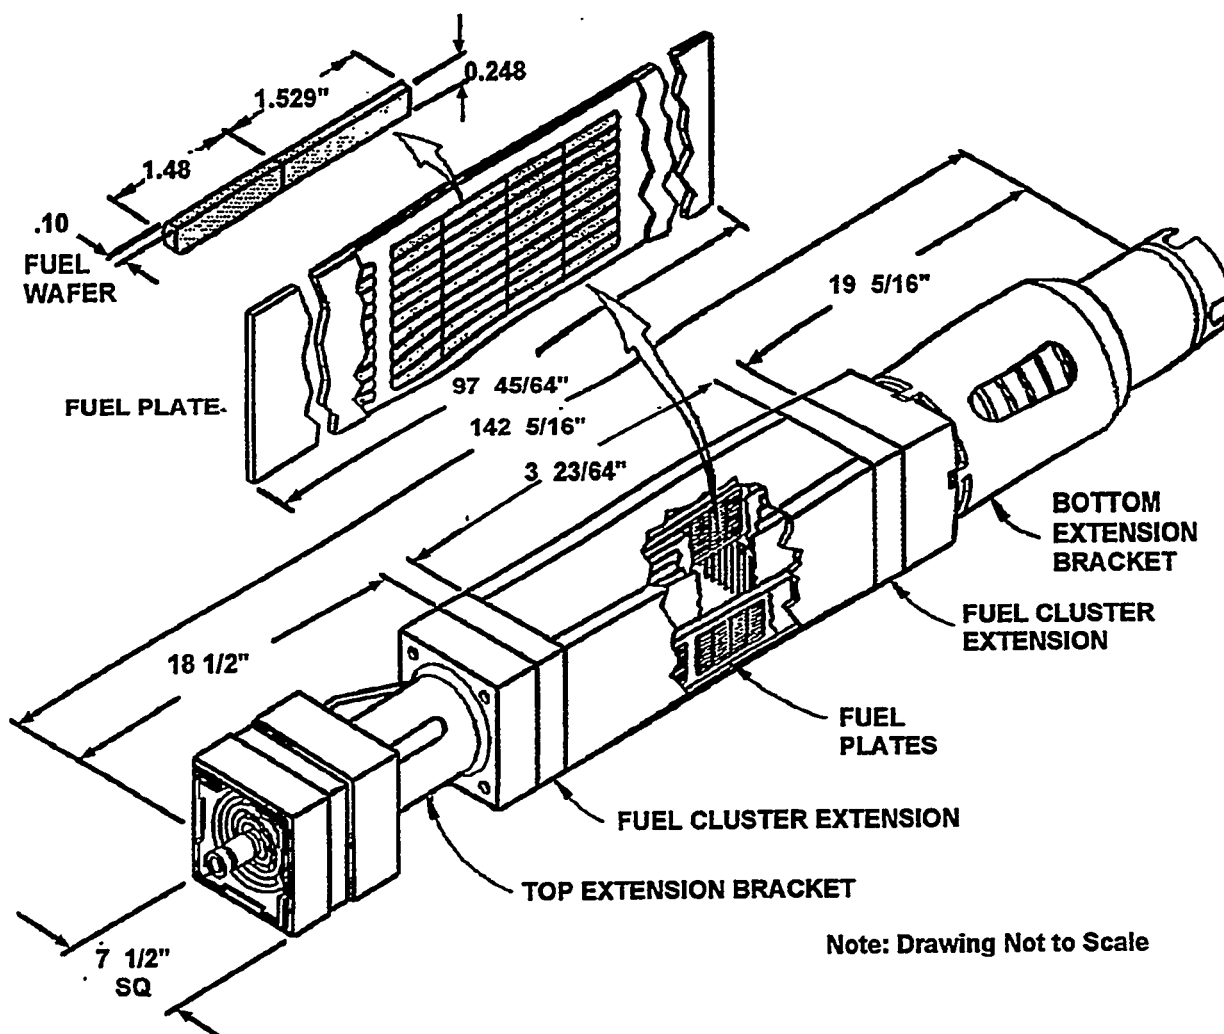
Shippingport Core 2 Blanket Fuel Assembly
